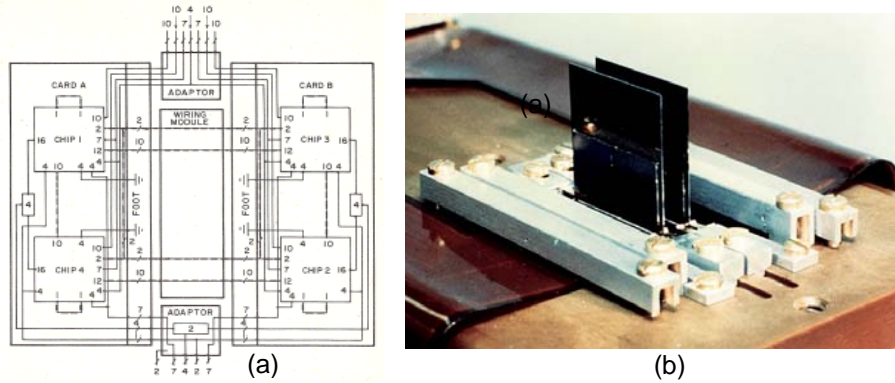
(a) CSM package wiring schematic, and (b) photograph of CSM assembly [60].
